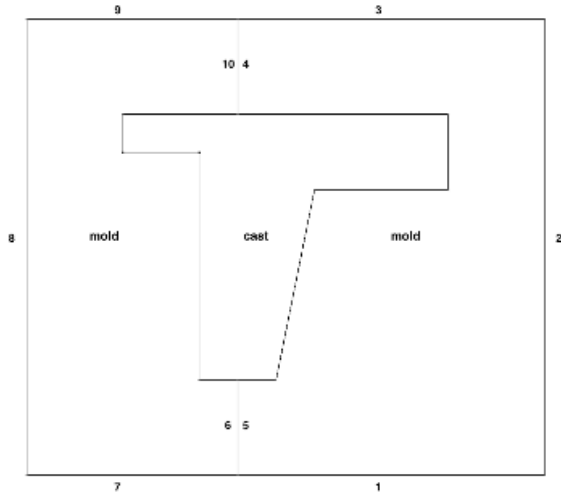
Geometry of example shape of mold and casting with numbers of boundary edges in mold.
